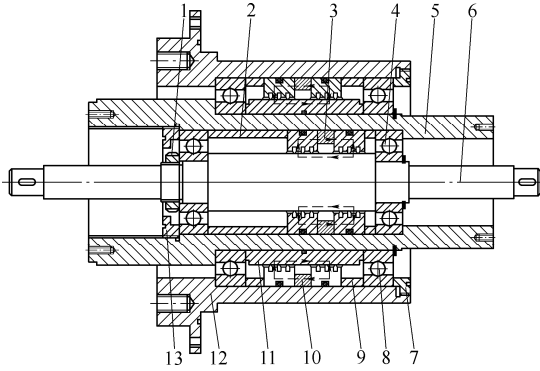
Final structure of coaxial twin-shaft magnetic fluid rotary seals
